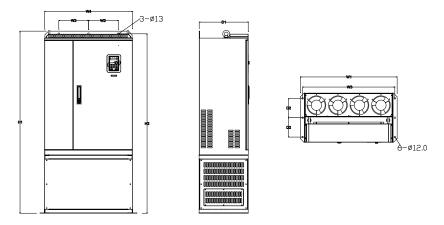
Floor installation of 380 V 220-315 kW VFDs
